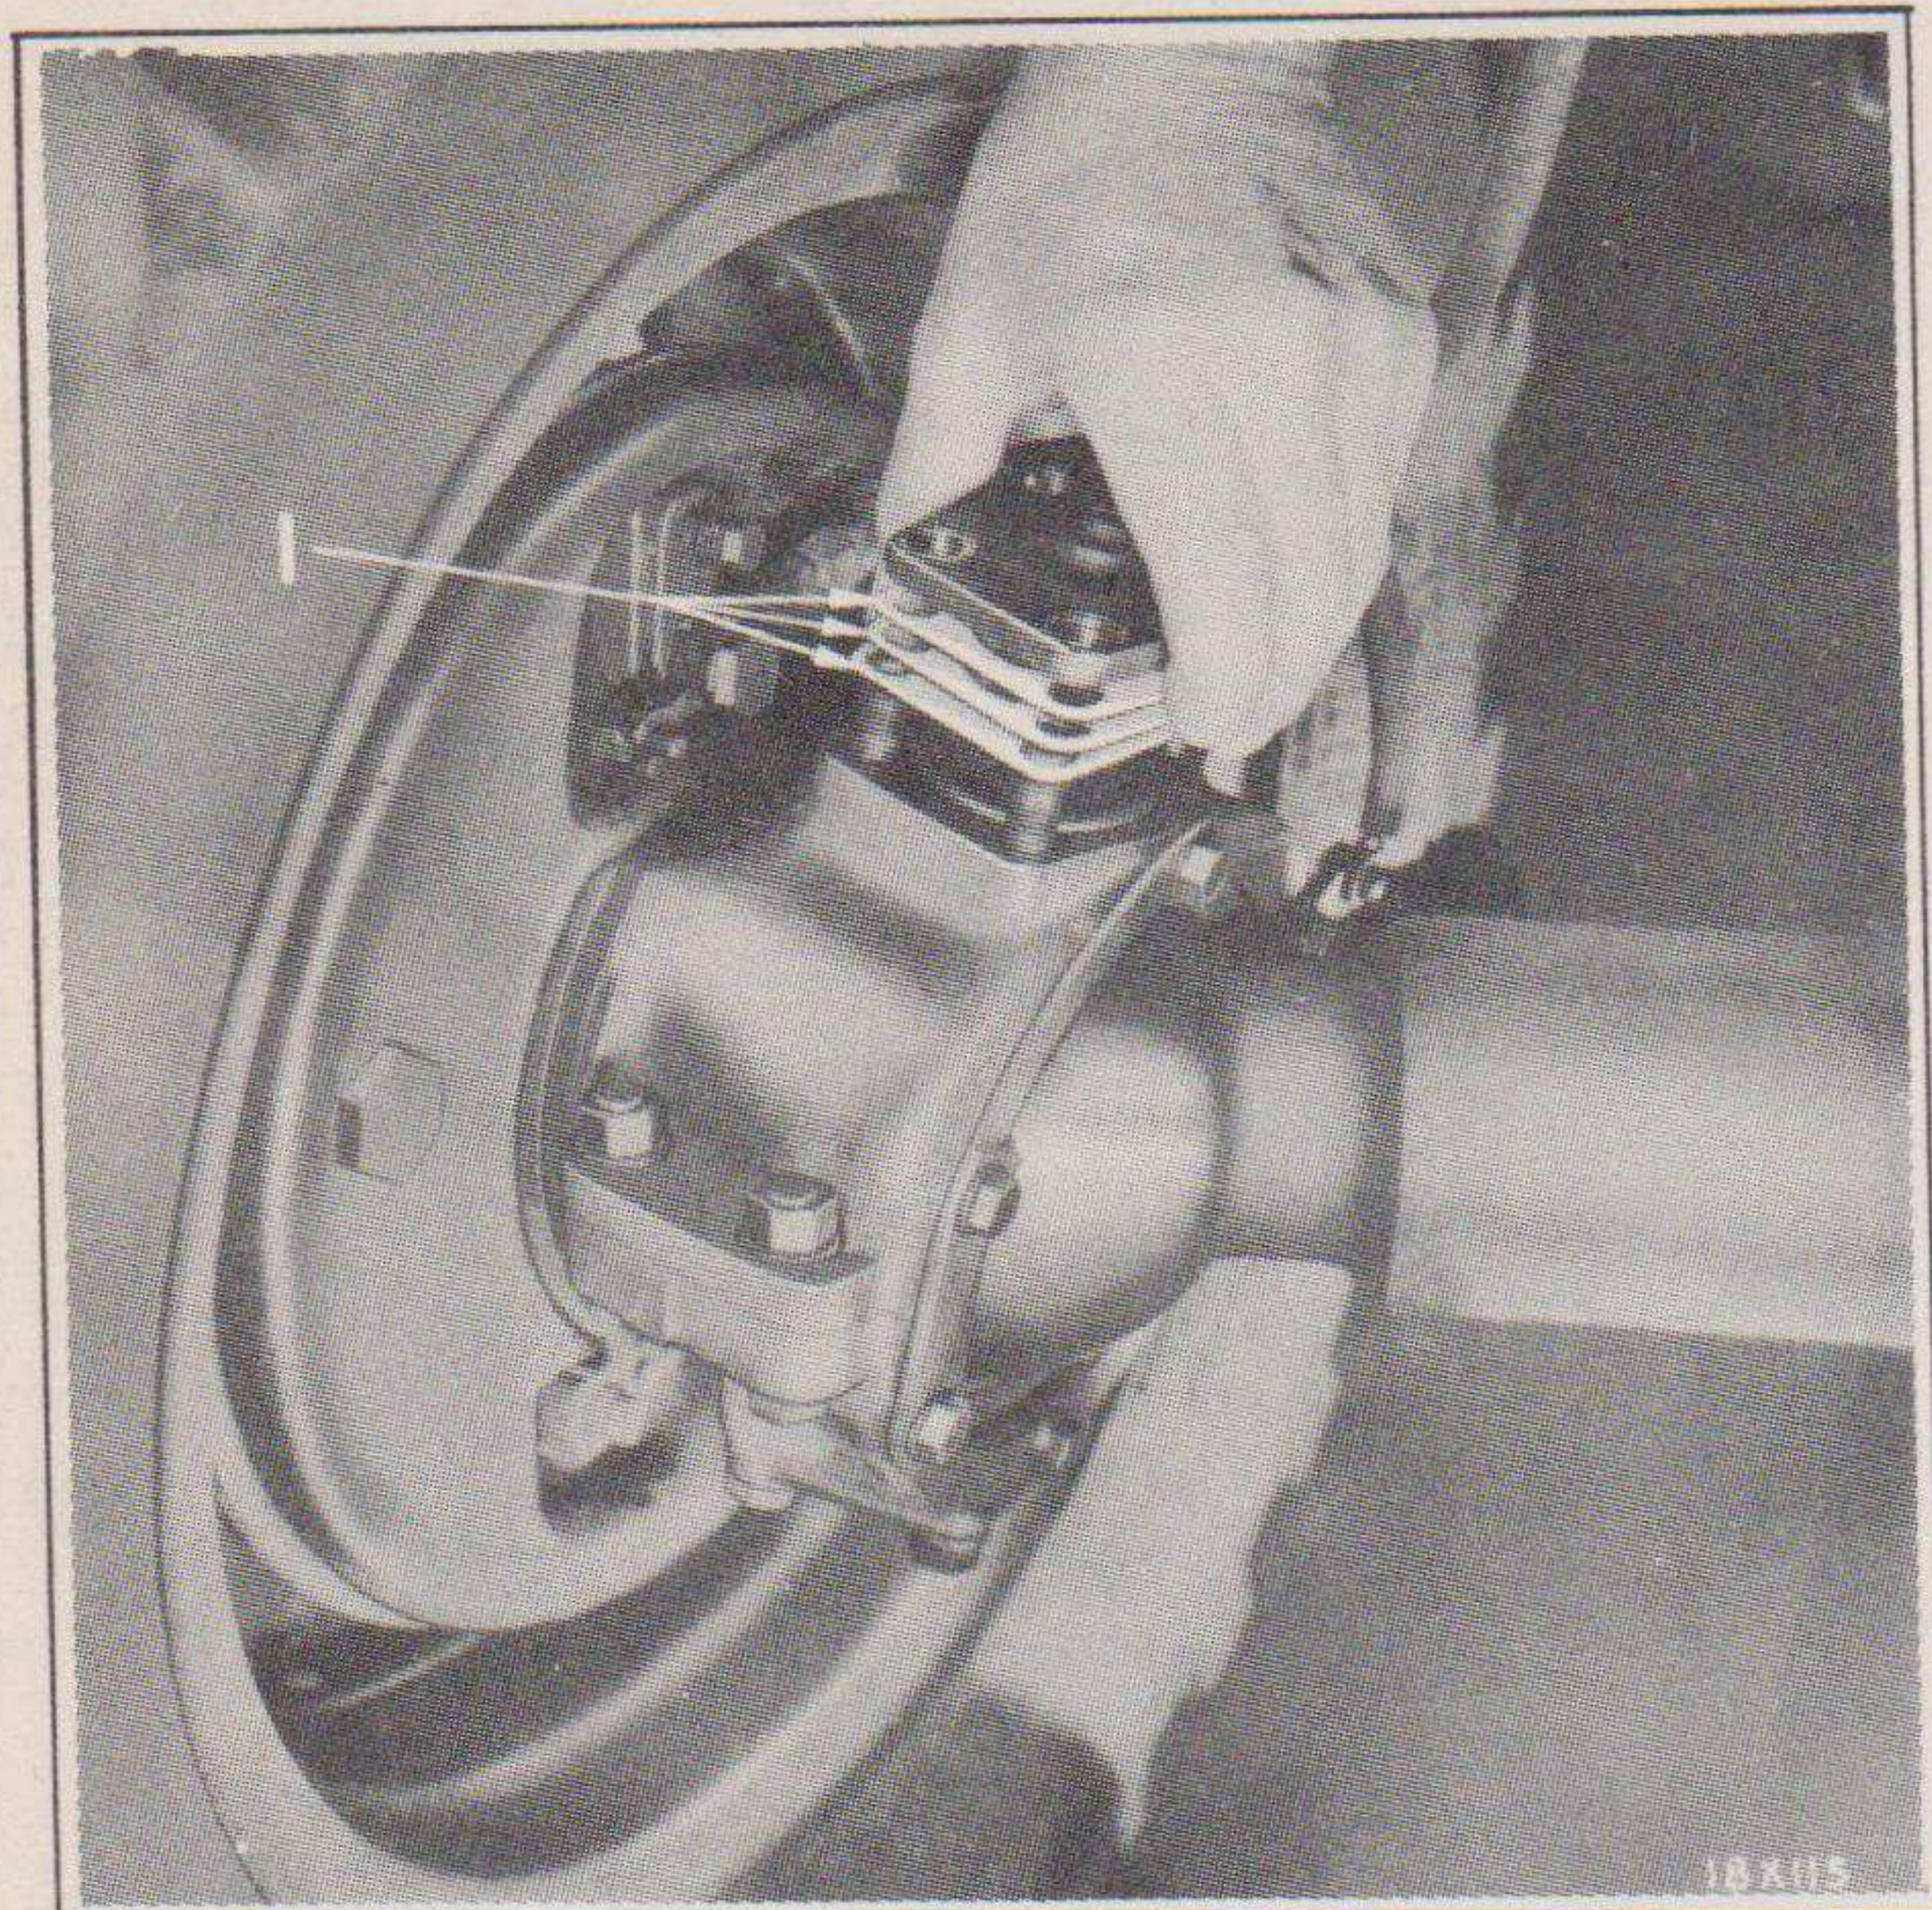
Steering Knuckle Flange Bearing Adjusting Shims
